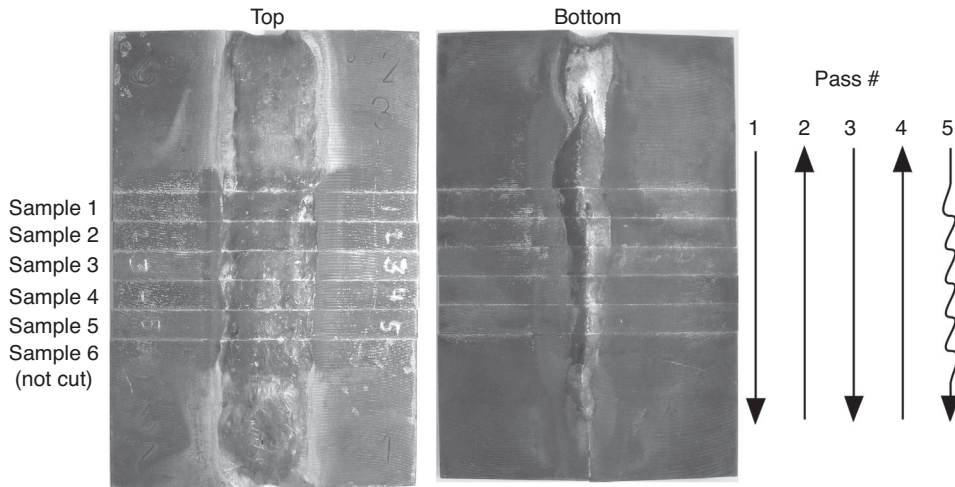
5 pass weld showing sample locations and welding direction. Top and bottom images of a 5 pass weld. Sample 6 has not yet been cut. Notice the large weld pool at the start of the weld, tapering away toward the base. This shape has been observed in a large percentage of our welds, and indicates the welding power was too low. The alternating welding direction was selected in order to minimize thermal gradients due to our small weld length. The final oscillating ‘filler’ pass was designated by a wavy line.
